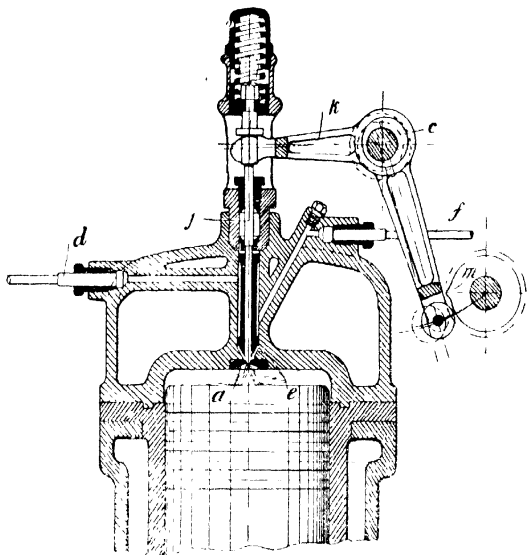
Cross-sectional elevation of cylinder, showing details of compressed-air atomiser and fuel-injection valve-gear used on the Flag-Diesel residual-oil engine.
